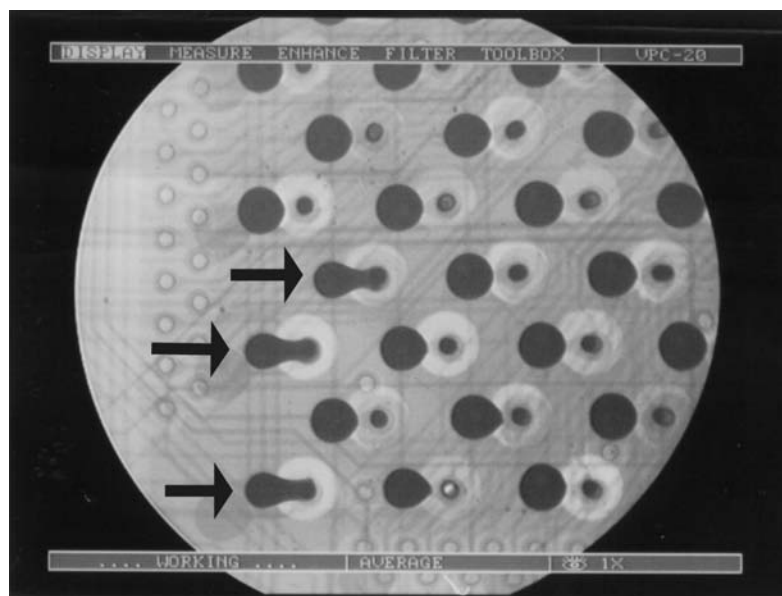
Starved solder joint (left) versus normal solder joint (right) for CBGA [2]
